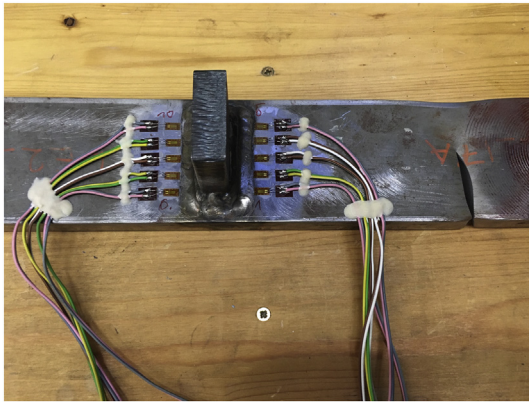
Fatigue failure in the base metal of the TIG-treated specimen.
